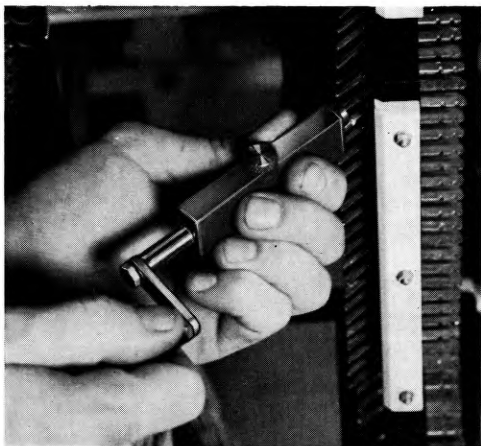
HAND WRAPPING TOOL BEING USED ON CONNEXION STRIP WITH ANGLED TAGS
